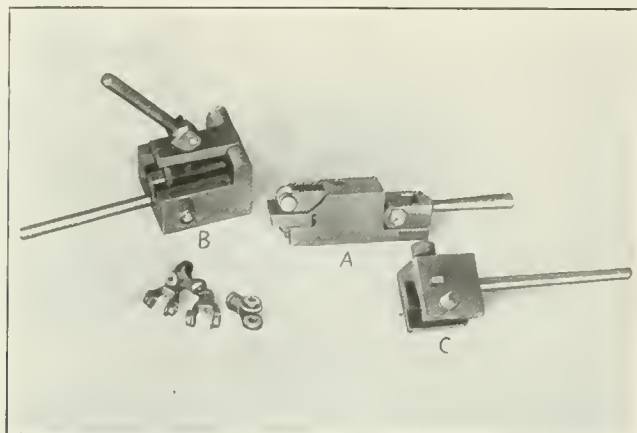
Jigs for Drilling and Milling the Rocker Arm Clevis
